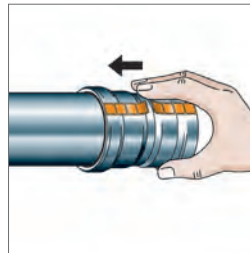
Ensure the proper seat of sealing element and cutting ring.
